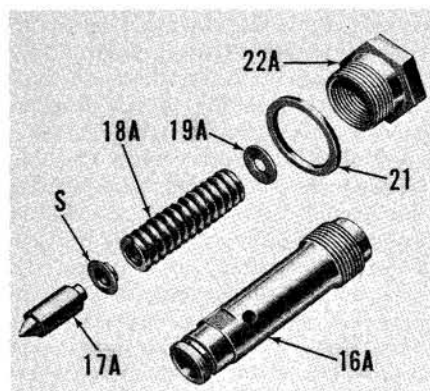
B — Exploded view of late production pressure relief valve assembly.
